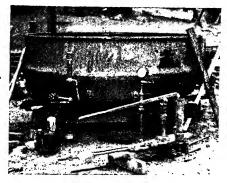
Oxwelded steam-jacketed kettle ready for hydrostatic pressure test.
